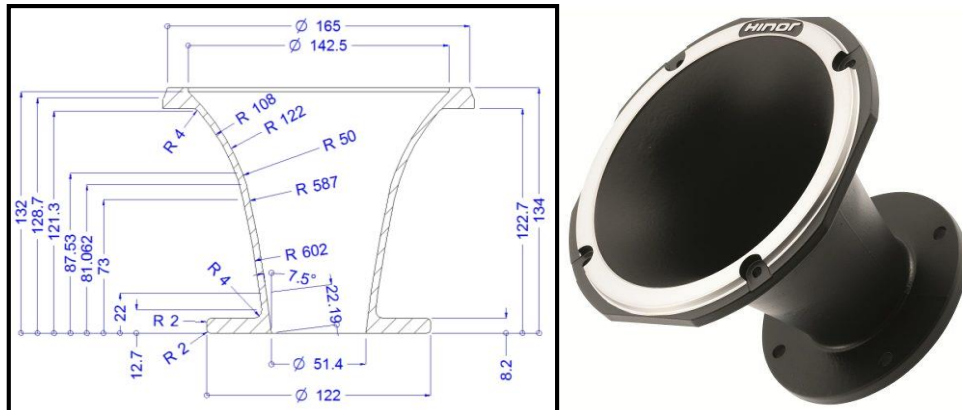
Sectional view of the horn CHC 14-50, drawing that is used for the production of foundry molds and isometric view on the right.
